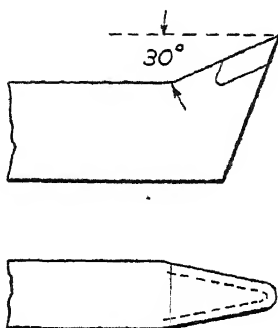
A special design of tool for turning commutators, which, of course, contain thin sheets of mica.
